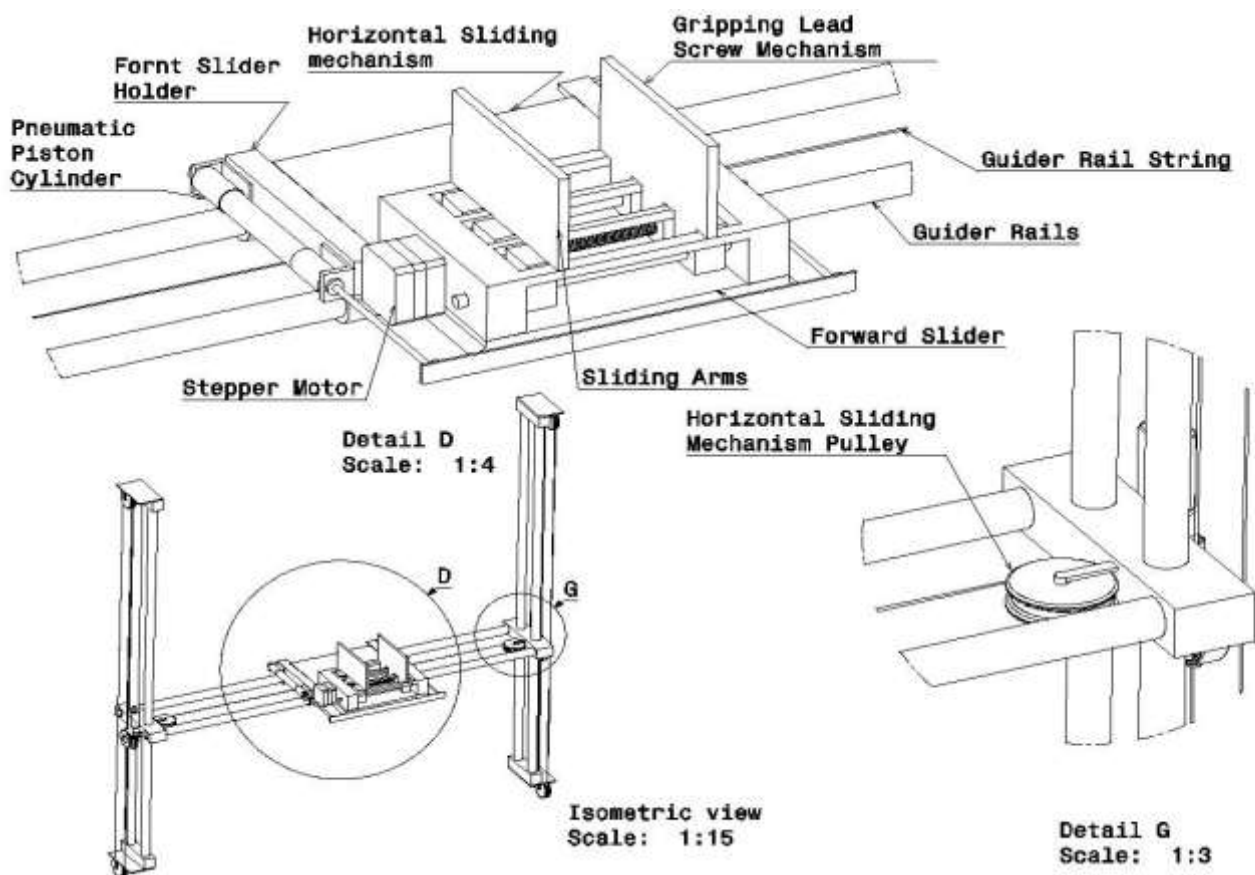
Isometric View & Detailed View of Mechanical Gripper
